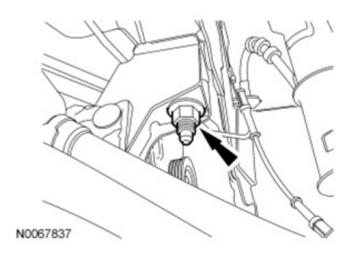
Locating Lower Subframe Nut Courtesy of FORD MOTOR CO.
